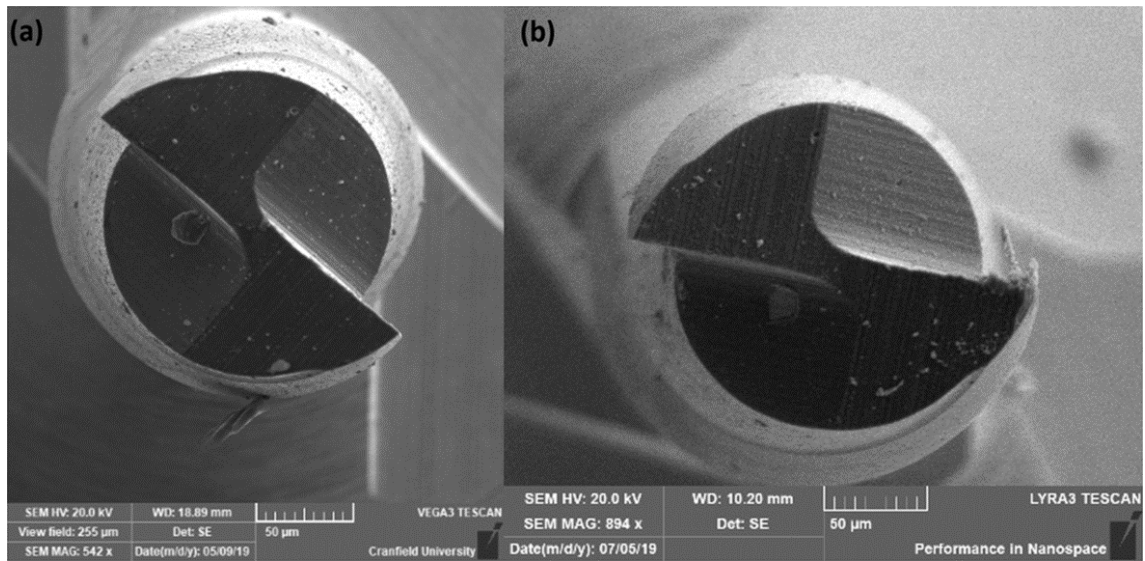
SEM image of HLS 1 (a) before (b) after machining.
